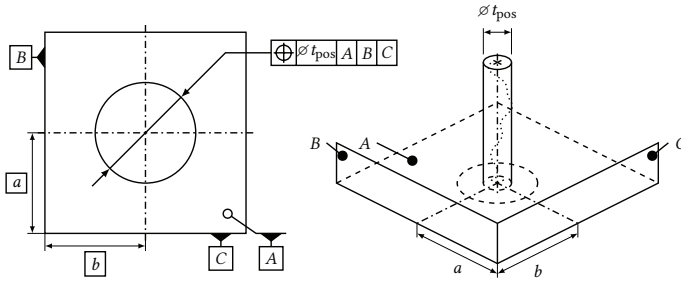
Position Tolerance Zone for an Axis
